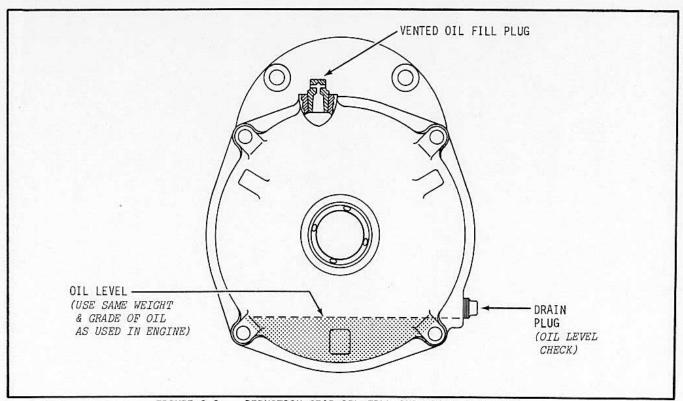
REDUCTION GEAR OIL FILL AND DRAIN LOCATIONS
